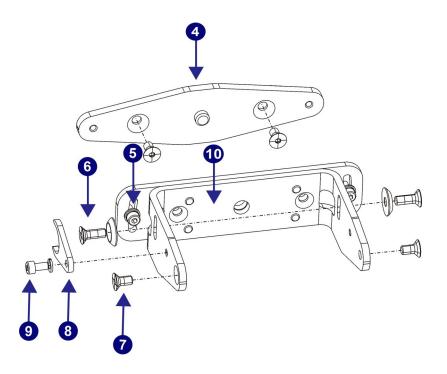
Pitch and Roll Angle Adjustment Bracket
